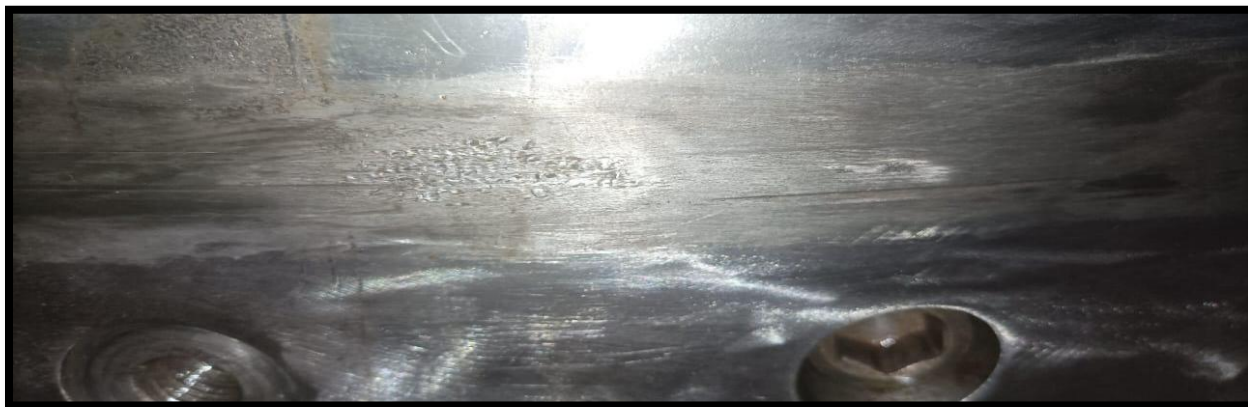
Bearing surface discoloration consistent with overheating and arcing.
